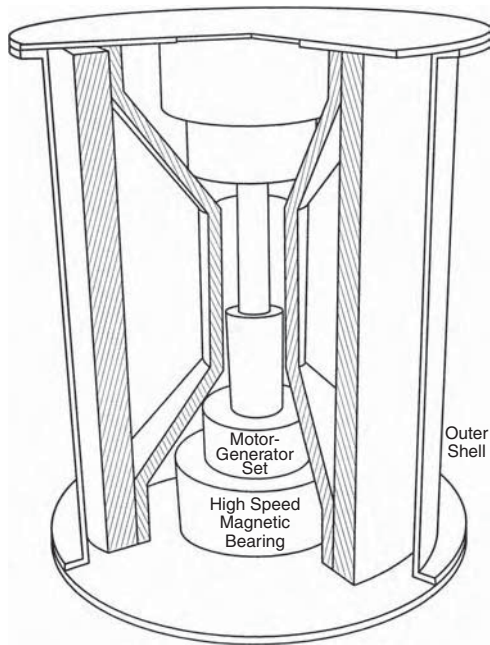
Flywheel configuration with rotor outside enclosing the motor generator and the bearing.
